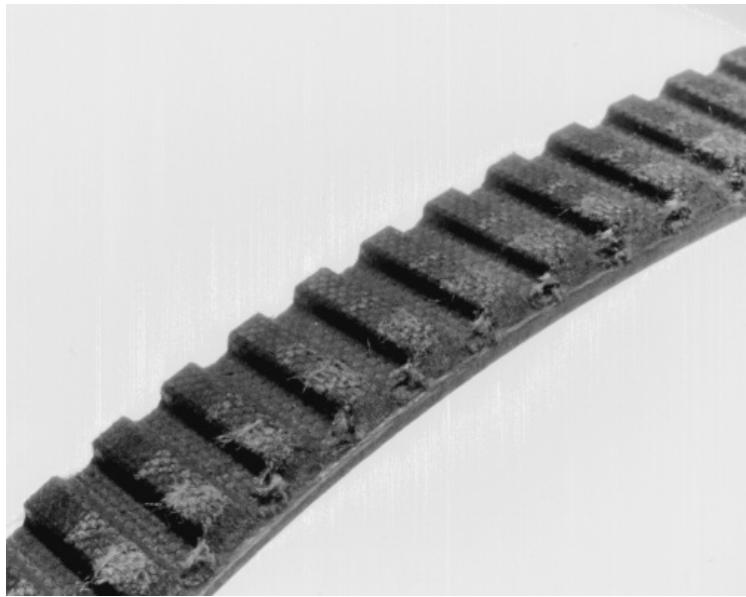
Inspect the timing belt for cracks, fraying, glazing or damage of any kind
